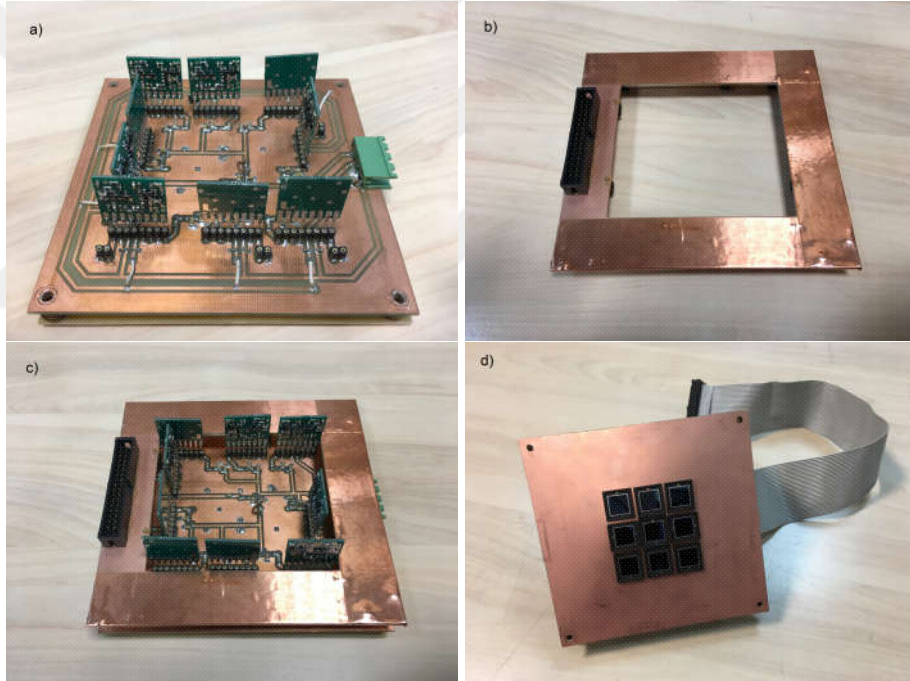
(a) *Sensor Module* main board with connected CSPs. (b) *Sensor Module* frame board for carrying the signal paths in a suitable form. (c) Rear view of the *Sensor Module* final form. (d) Front view of the *Sensor Module* final form.
